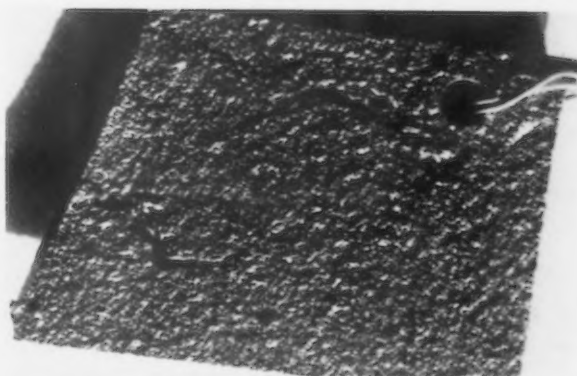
The dry sand core side of a casting showing a gas seam defect caused by having the core sand too coarse, allowing gas to escape too suddenly into the mold cavity.
